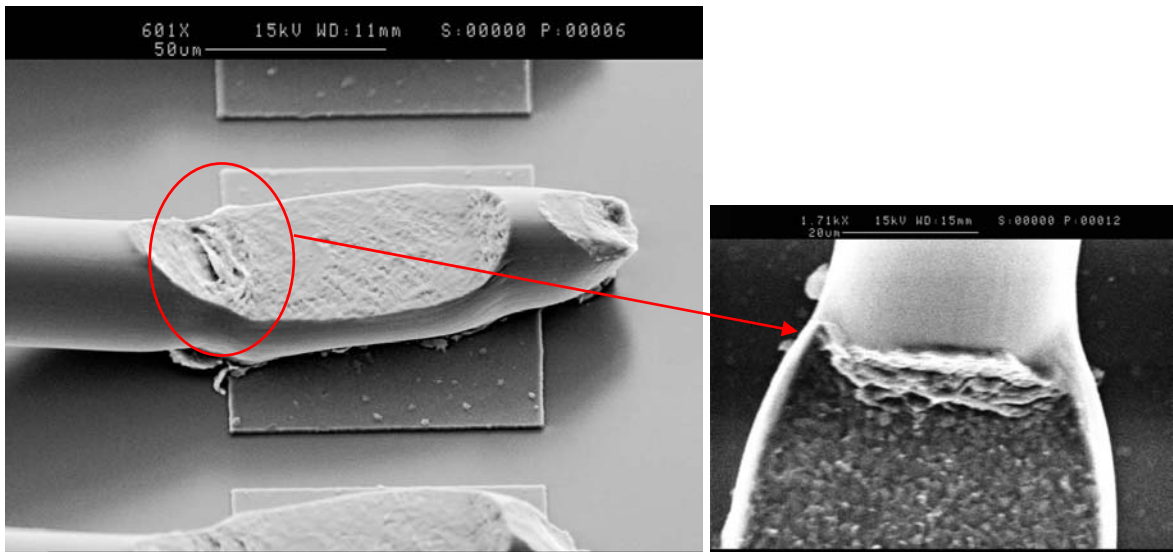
Heel crack condition of the bond formed by the composite transducer.
